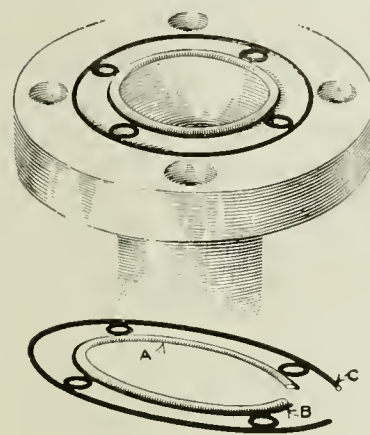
GASKET FOR WIDE-FACED PIPE FLANGE
